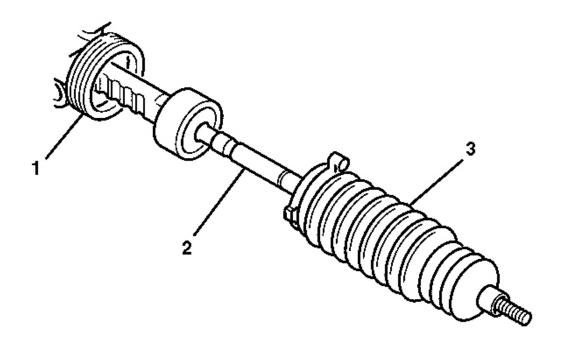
Inner Tie Rod, Rack And Pinion Gear & Rack And Pinion Boot Courtesy of GENERAL MOTORS CORP.
